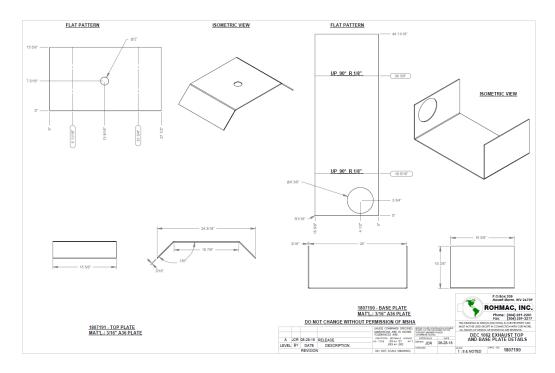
Updated Exhaust Cooler Plate Dimension Drawing
